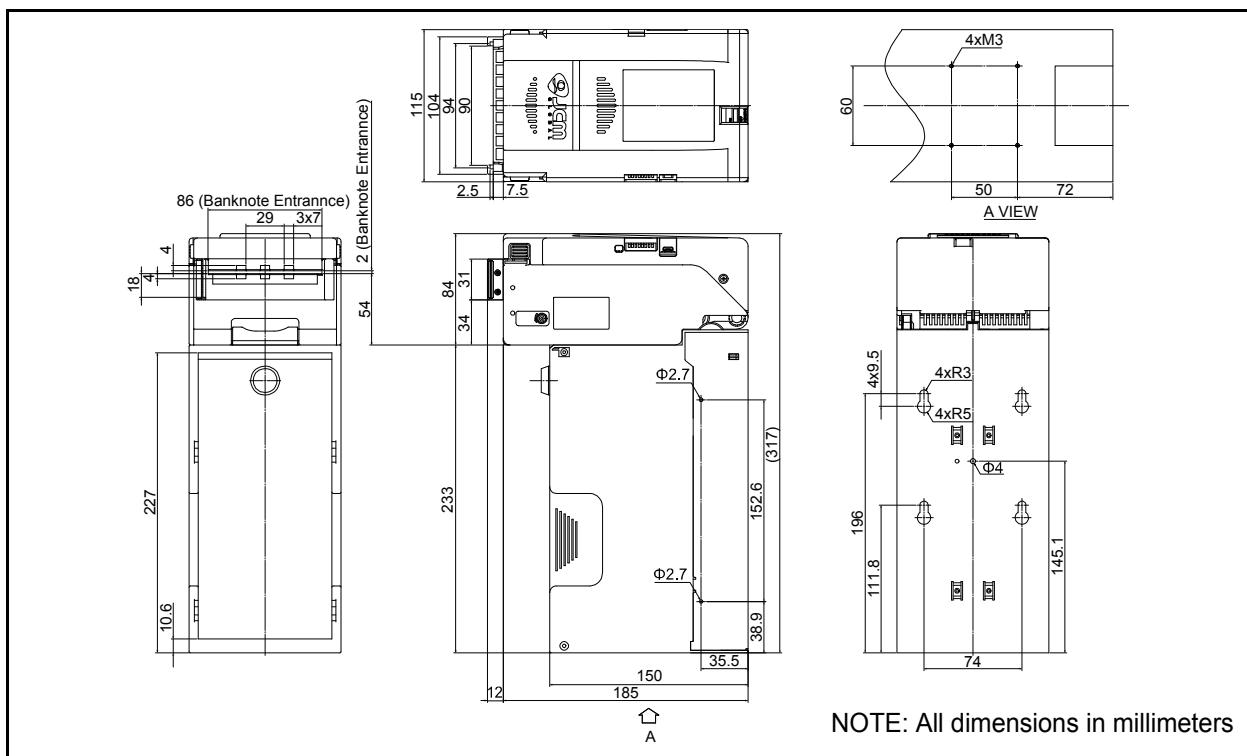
illustrates the EBA-40 Unit with the Bezel and Mounting Bracket outside dimensions.
